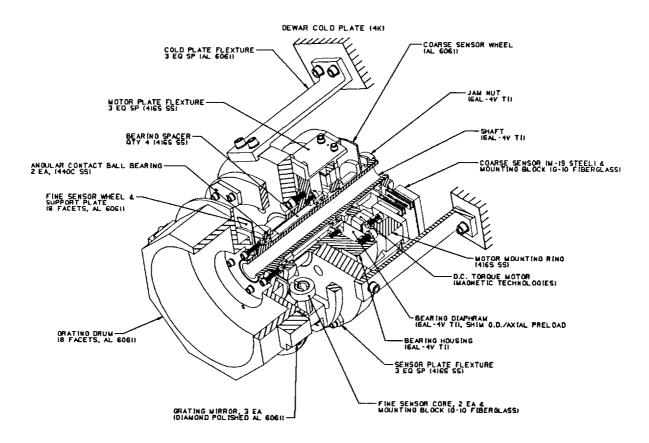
Isometric cut-away view of the IRS grating drive mechanism.
